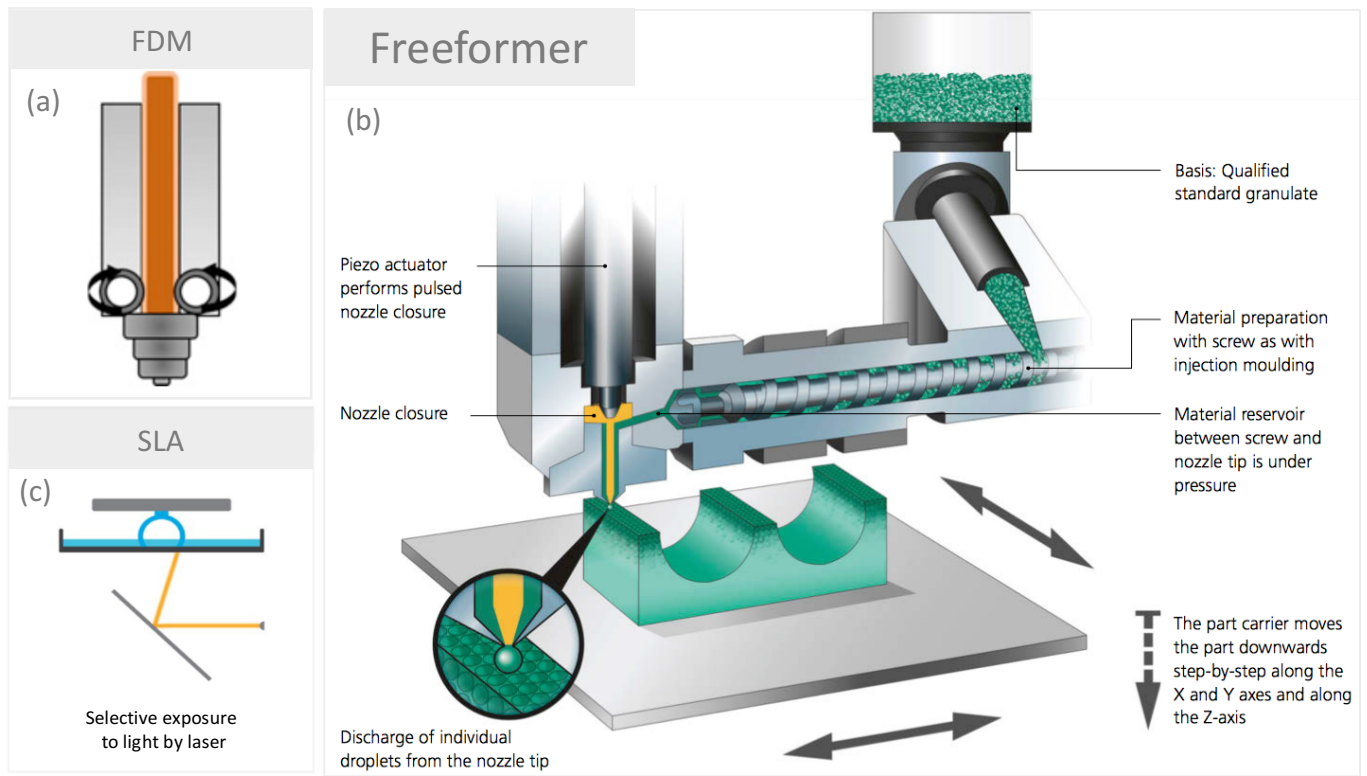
Techniques used by the various 3D printers. (a) Ultimaker 2+ is an FDM printer which extrudes filament through a heated nozzle tip [58]; (b) Freeformer uses material in pellet form which is warmed up in a screw before being melted in a chamber at the tip and extruded droplet-by-droplet [59]; (c) Form 1+ uses SLA technology in which a laser shines and crosslinks the resin to form the printed sample [60].
